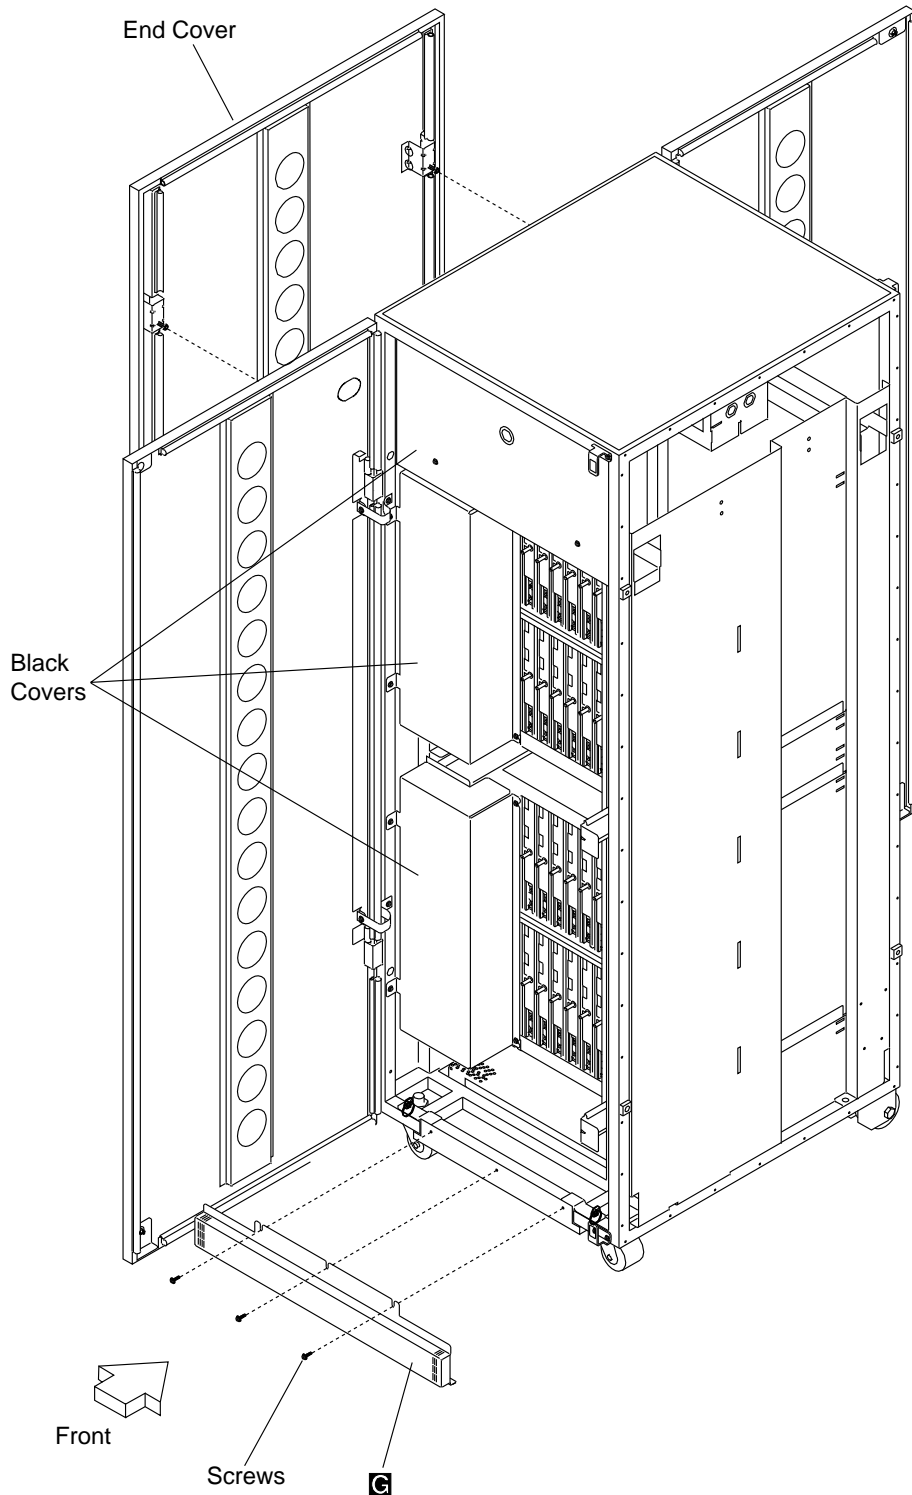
Ground Bracket on a 3746-L Expansion Unit (Front View)
